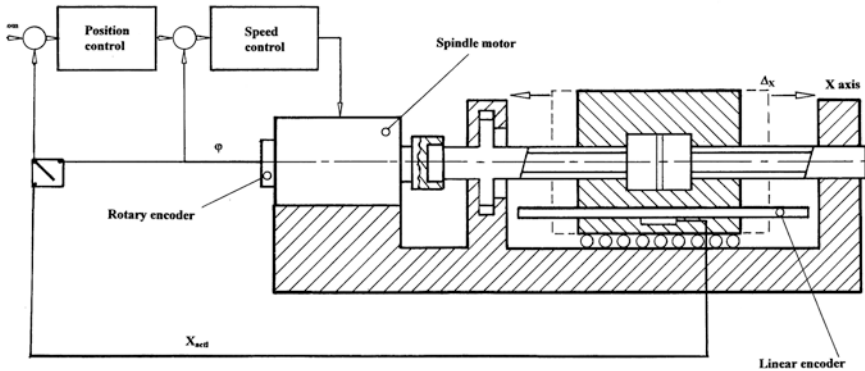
Typical electromechanical drive systems for machine tools [courtesy of Heidenhain (GB) Ltd.]
